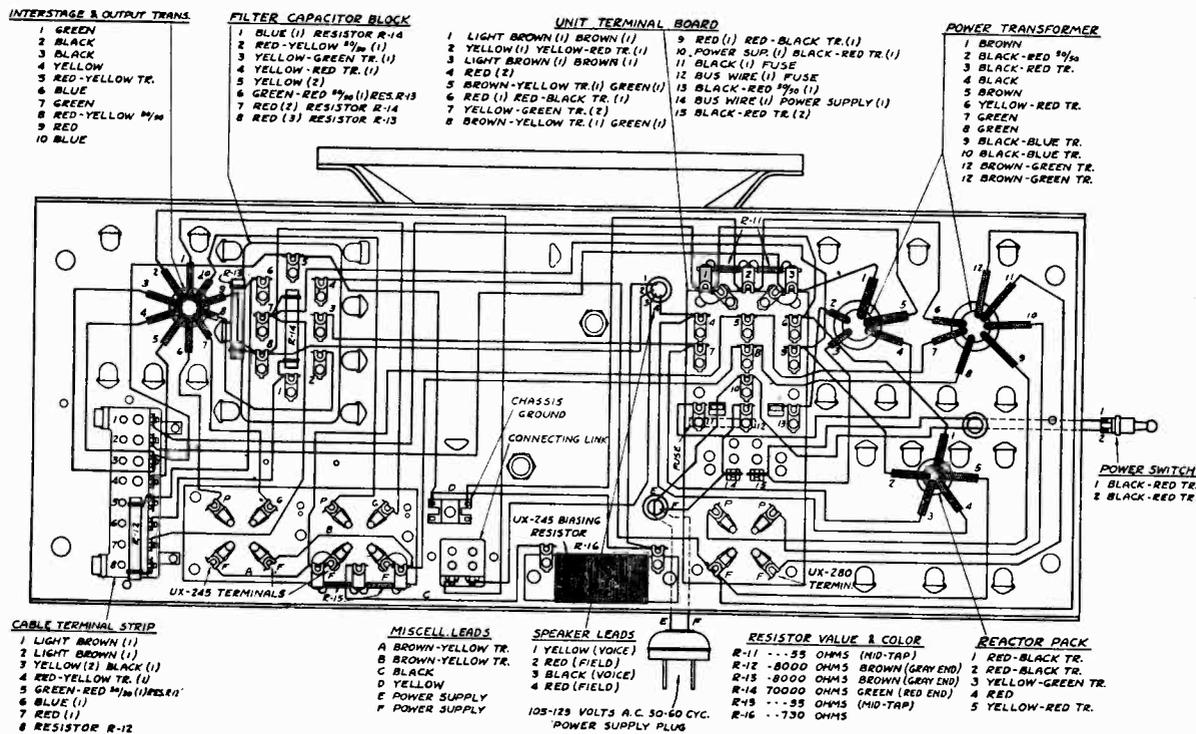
Bottom View of Radio Chassis, Showing Wiring Between Terminals.
